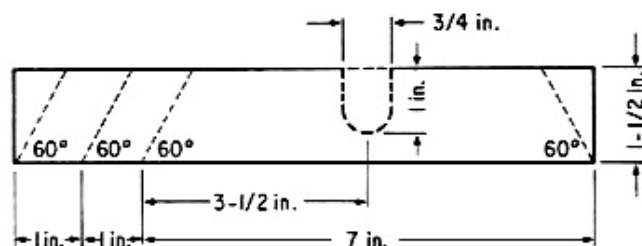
Flat aluminum to be used for mounting directional control motor. Cut on dotted lines.
